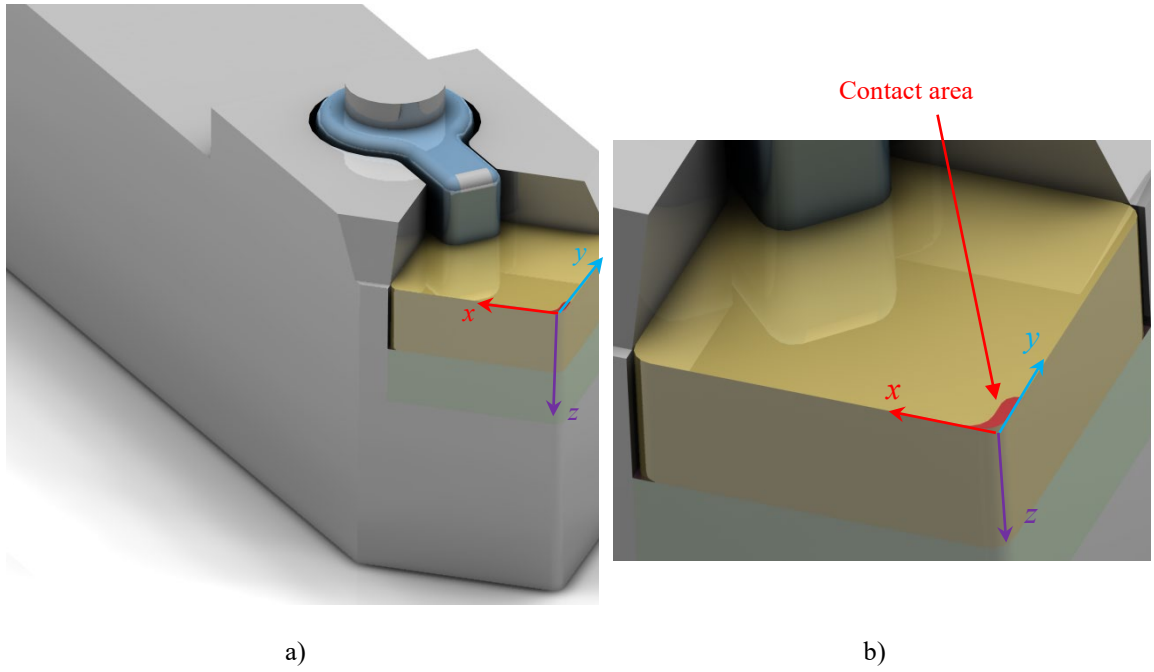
a) Tool set, Shim and Tool holder, and b) Detail of the contact interface between the tool and the workpiece.
